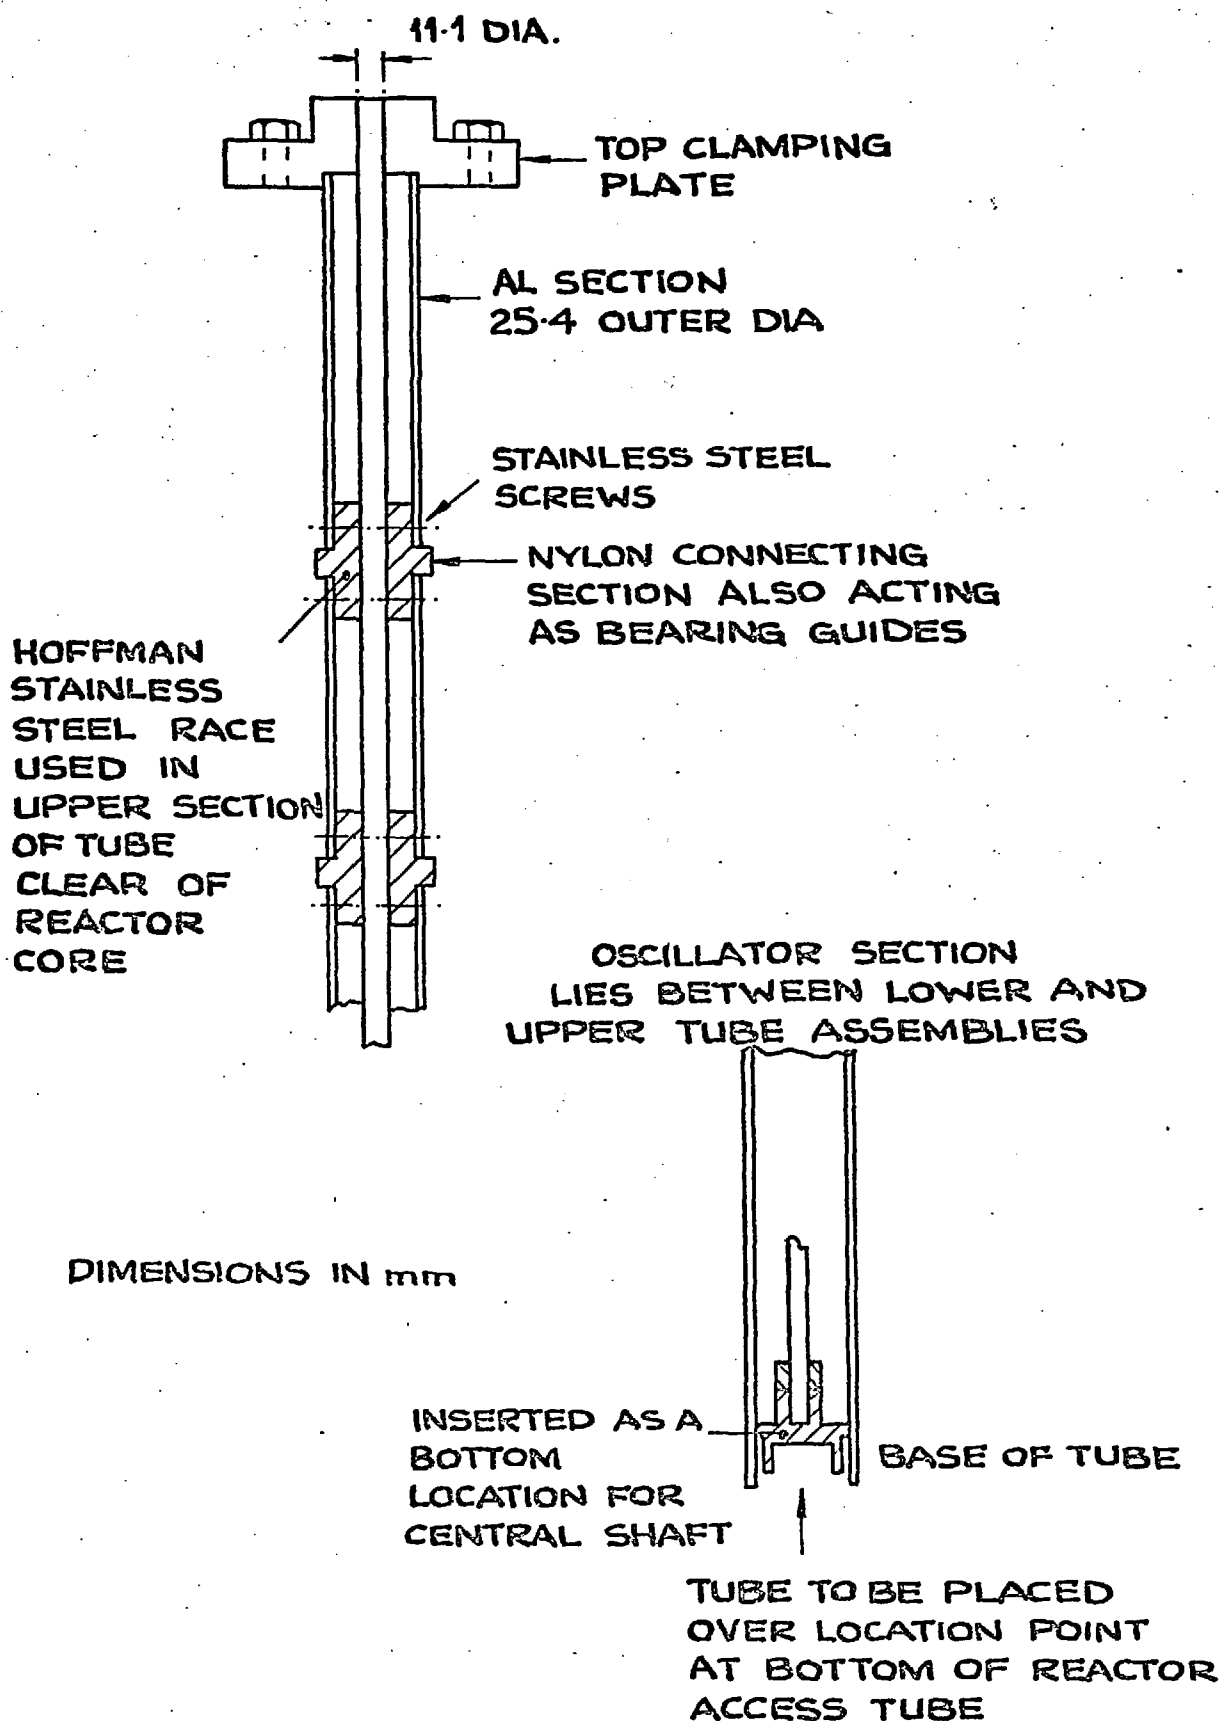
SCHEMATIC OF TUBE DRIVE ASSEMBLY FOR OSCILLATOR.
